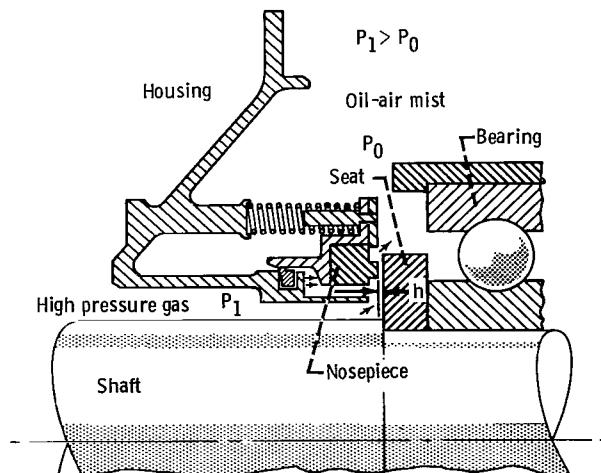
Mainshaft seal for bearing sump in gas turbine engine.
